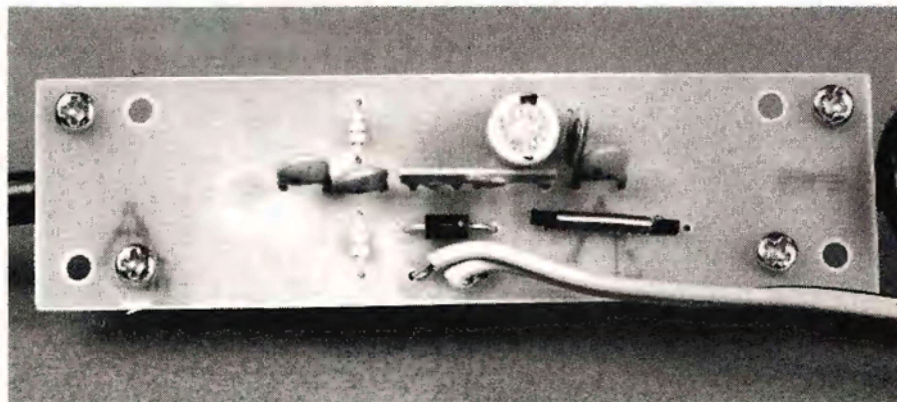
the parts layout on the PCB. Be sure to keep all component leads as short as possible and take care when installing polarised components.
